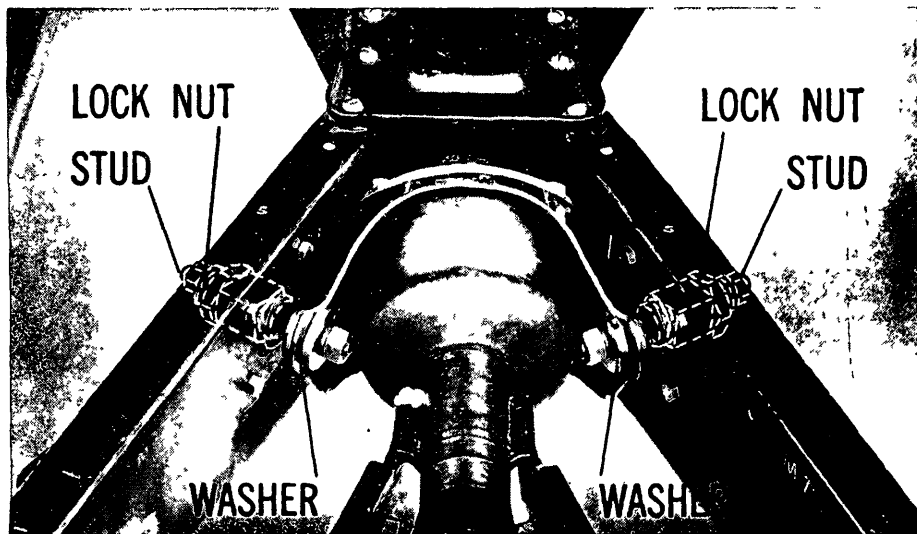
Torque ball mounting. 1939 Series 40, 50
